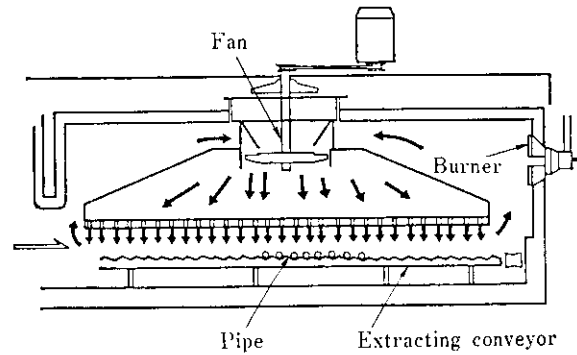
Recirculating fan of the soaking zone in the drawing furnace
